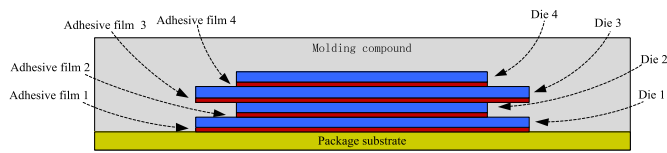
Schematic of four-tier die SiP stacking assembly.
